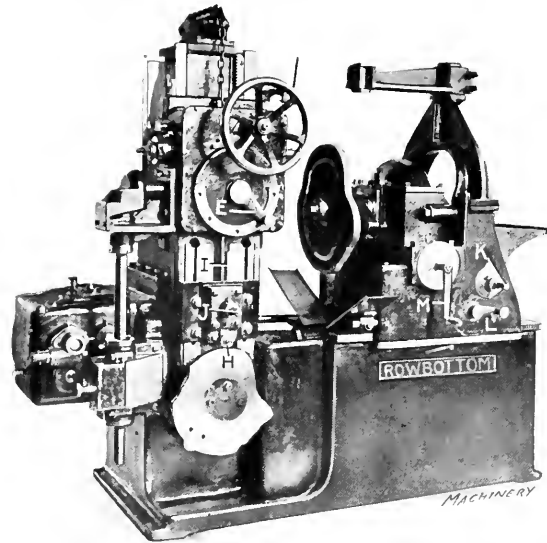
Front View of Rowbottom Universal Cam Milling Machine
